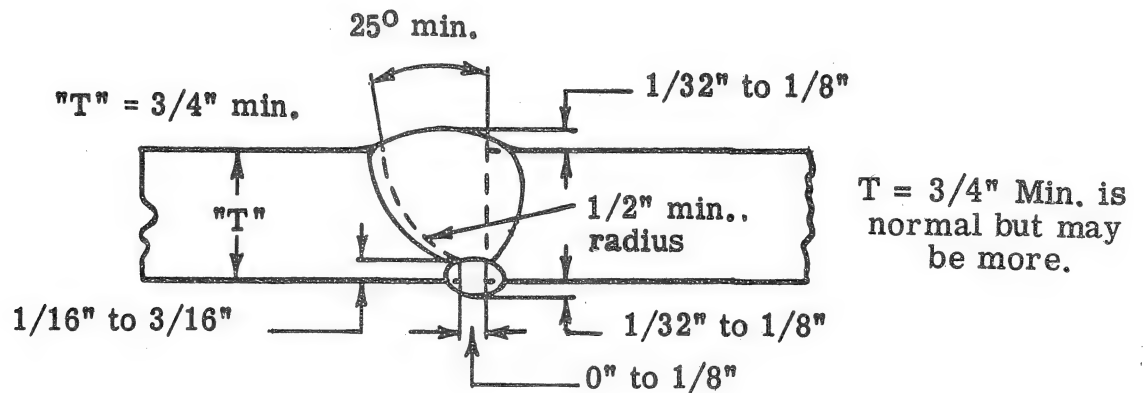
J-Groove Weld welded both sides.
